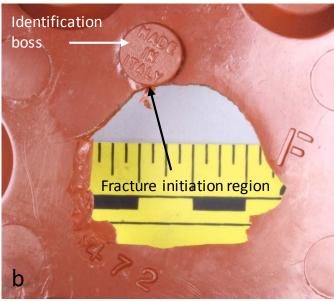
Bottom or inside view of the fractured region on the distributor cap body.
